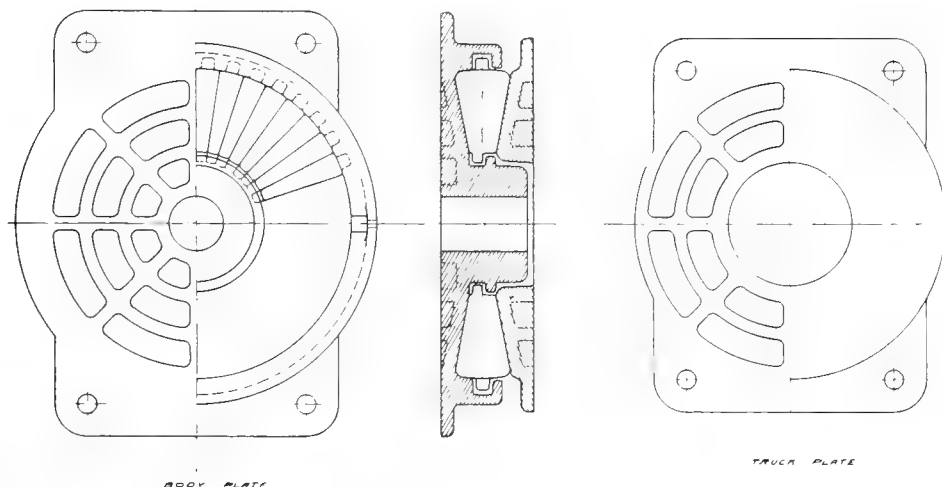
General Arrangement of 12 in. Roller Center Plate. Edwin S. Woods & Company.
